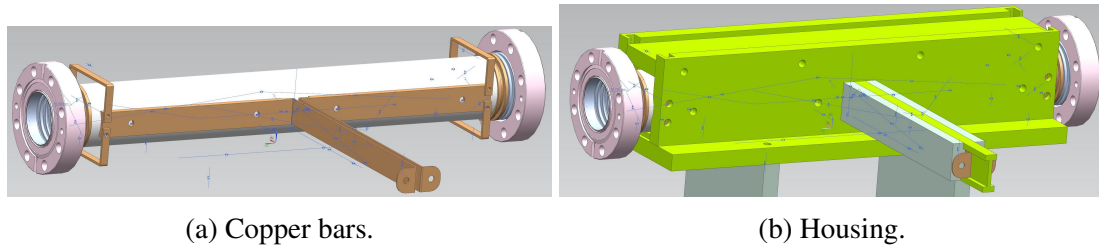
Technical drawing of the kicker. Courtesy of F. Obier.
